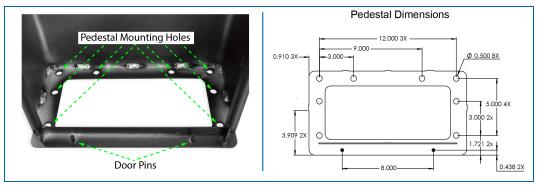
Pedestal Mounting Hole Locations and Dimensions
